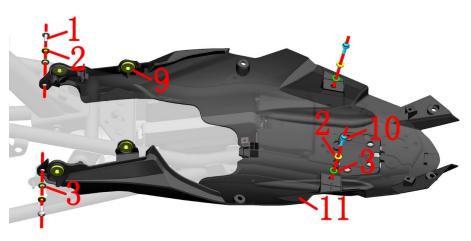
RI	EAR COVER	Tail light and tail skirt assembly	CHK	401
